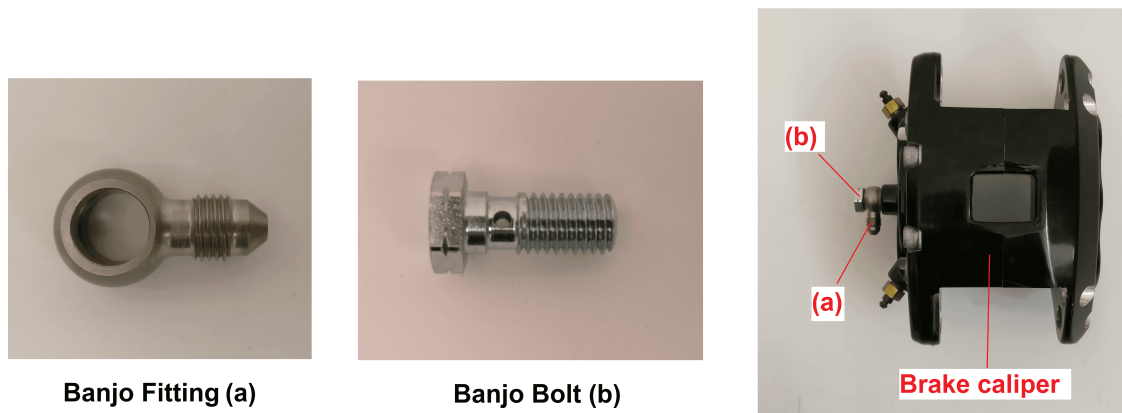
Banjo fitting, banjo bolt and its assembly on the brake caliper
